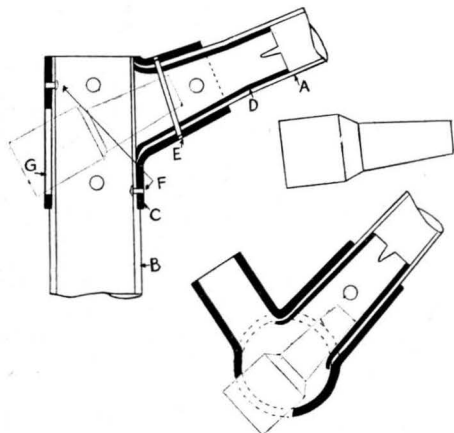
The Caminargent frame joint: uppermost diagram, steering head joint; A, Duralumin top tube; B, Duralumin head tube; C, Steel lug; D, Duralumin reinforcing sleeve; E, Diametrical pin; F, Rivets; G, Tapered chuck. Centre illustration: Form of tapered chuck. Lower diagram: Bottom bracket.
